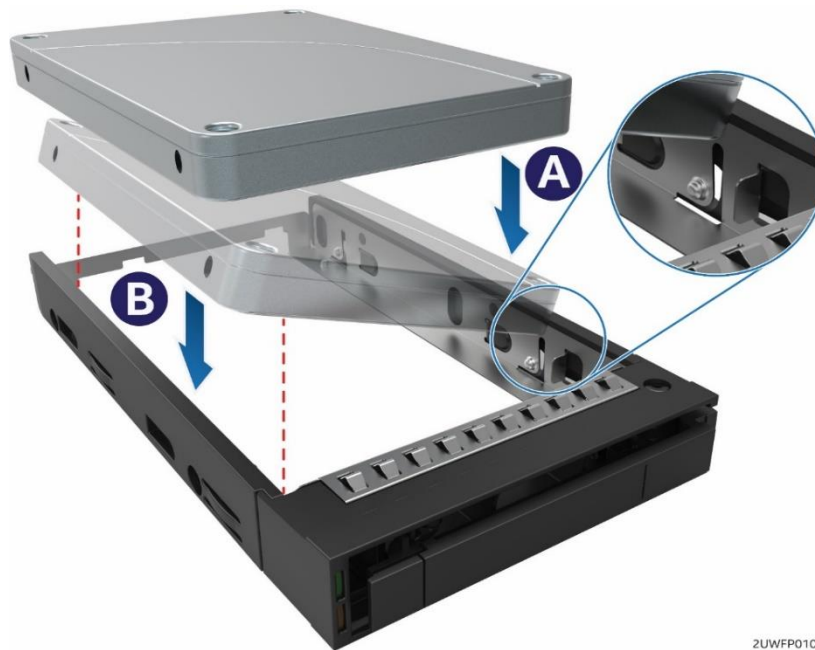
2.5" drive carrier assembly – drive installation into carrier
